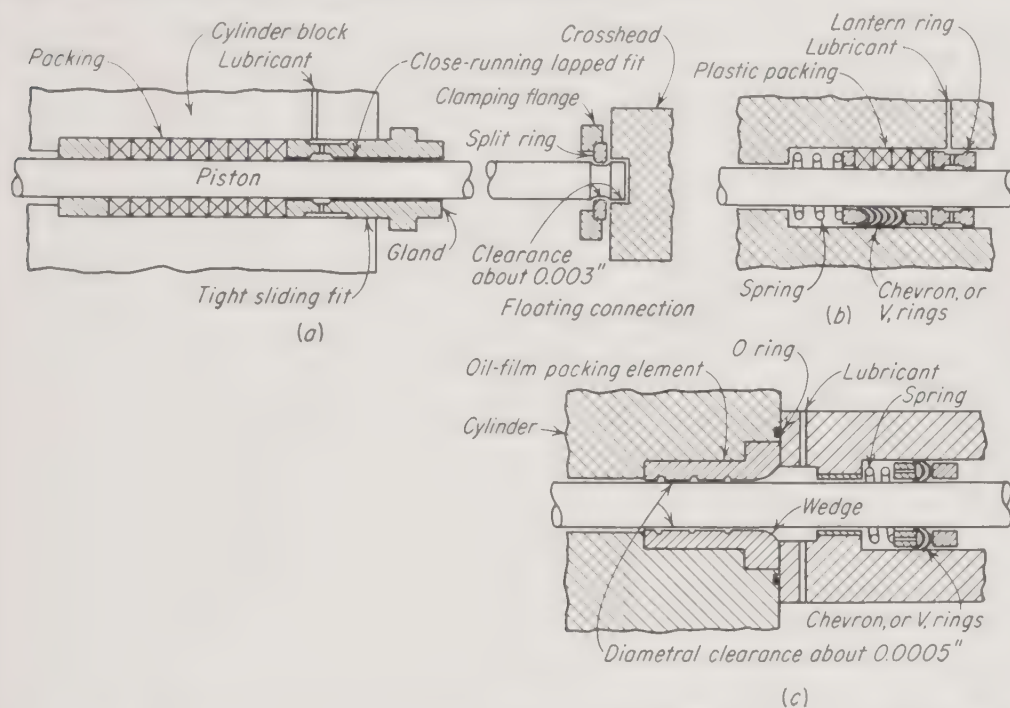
Packing for reciprocating shafts. [From Walter Coopey, *Chem. Eng.*, 58(7):116 and 58(11):164 (1951).] (a) Soft-packing installation. (b) Spring-loaded packing rings. (c) Wedge action.
